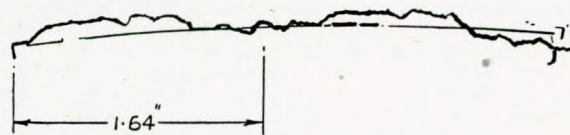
shows a record taken by this instrument, giving the worm periodic in a solid-table machine.
